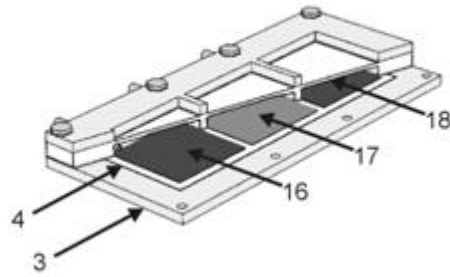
Isometric view of a partial section of the assembled device in closed configuration.
